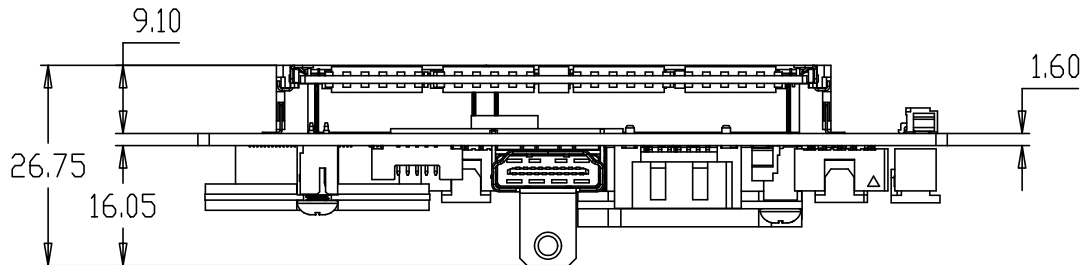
Motherboard Back Panel I/O Mechanical Drawings
